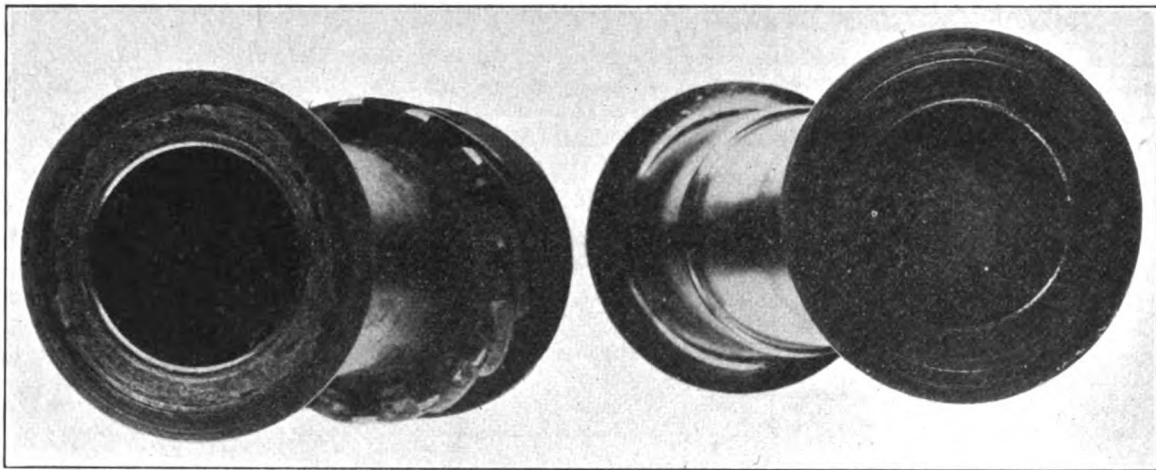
Lower center and lower side driveshaft spacing sleeves after preliminary runs on the dynamometer.
